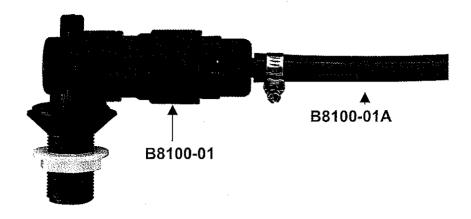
Exploded Parts View of Lower Inlet Supply Assembly
